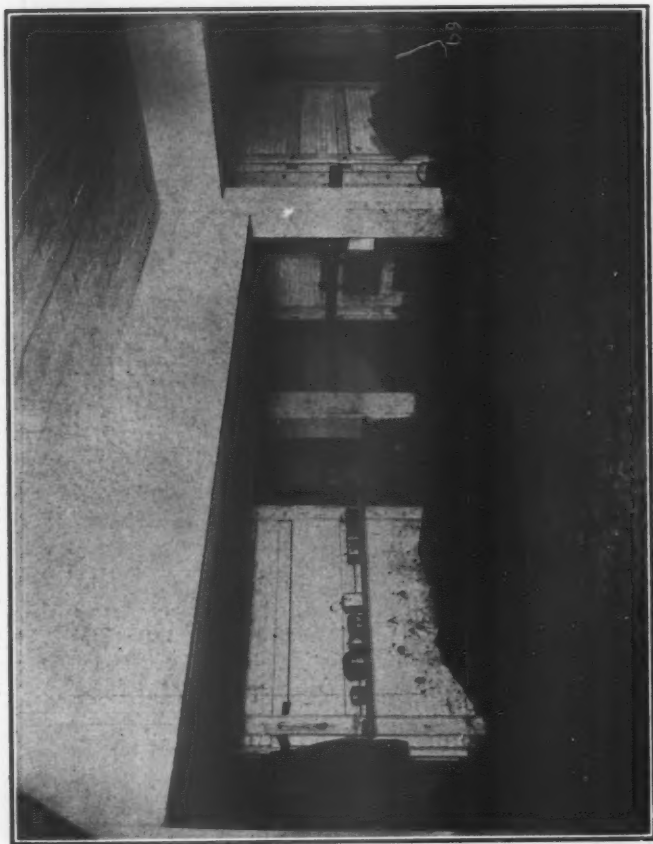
FIRING PIT FOR CORE OVENS PLACED IN BASEMENT.
